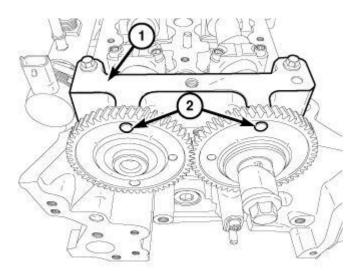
Camshaft Timing Tool & Sprockets Holes - Right Courtesy of CHRYSLER GROUP, LLC
